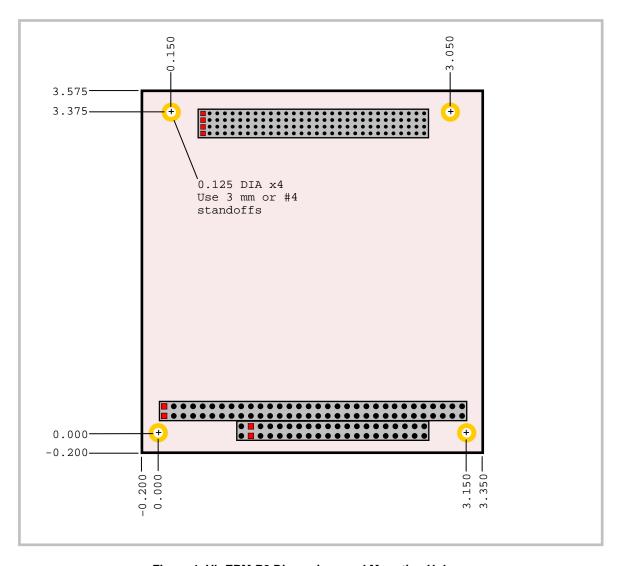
VL-EPM-P2 Dimensions and Mounting Holes
